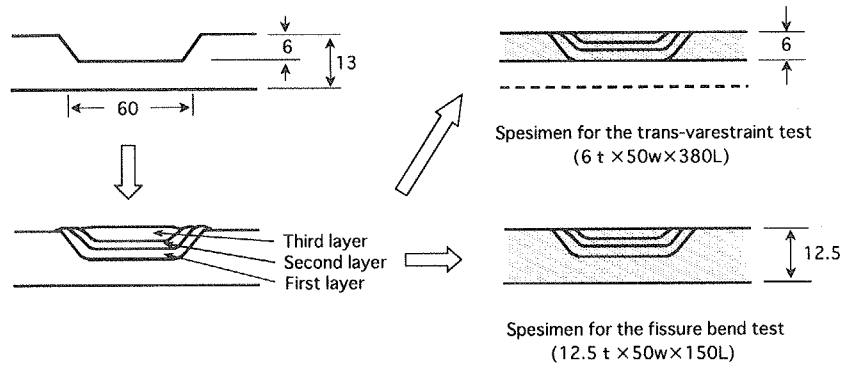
Preparation of specimens for the welding crack test
